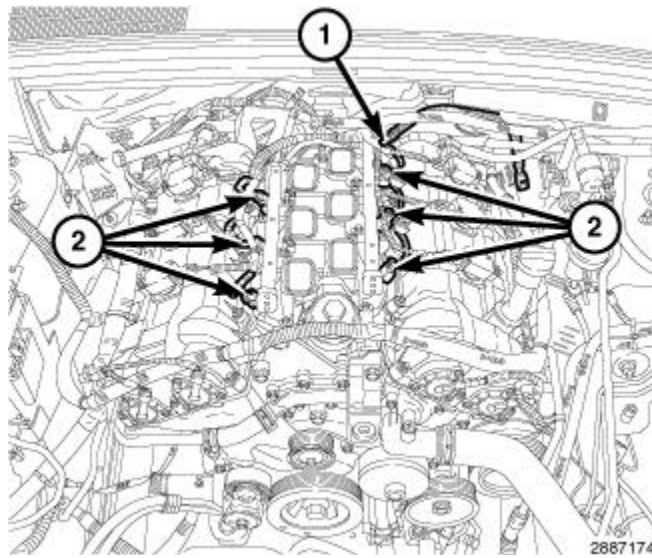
Fuel Supply Hose & Fuel Injector Electrical Connectors
